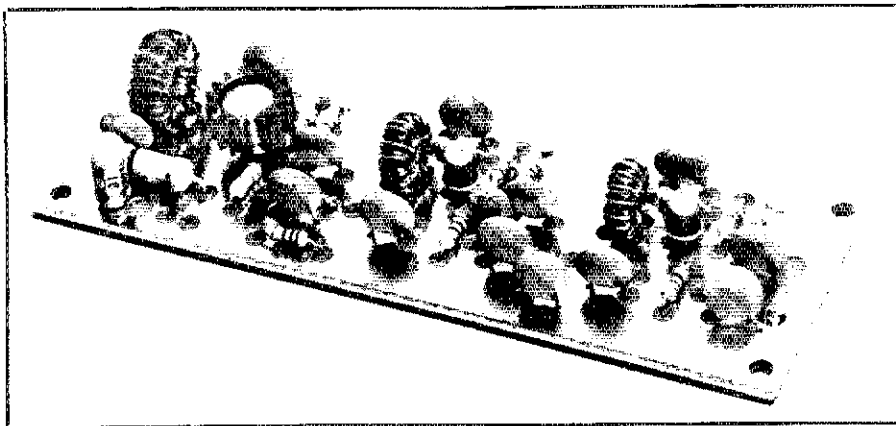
The assembled broadband amplifier. Note that in-line layout is used.
